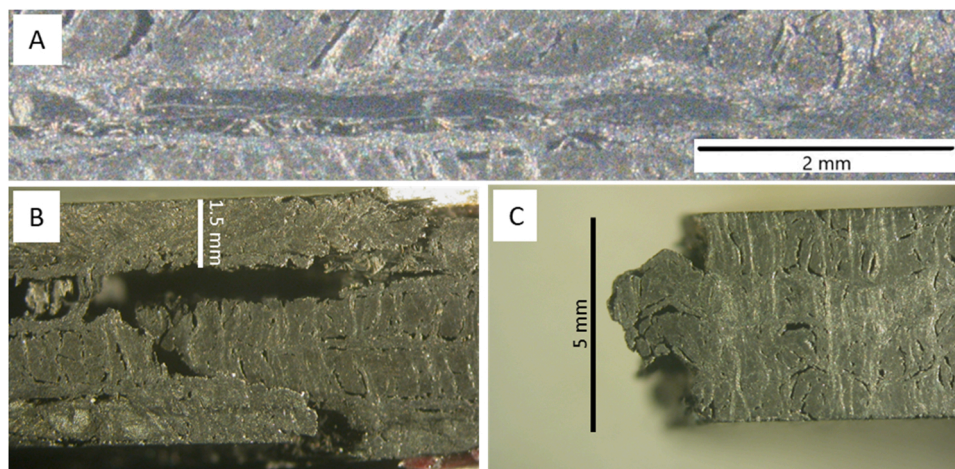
Typical defects of the 2.5D C/C laminates under investigation (A) and fractures after tensile tests in a Pseudo 45 (B) and Radial (C) specimen.
